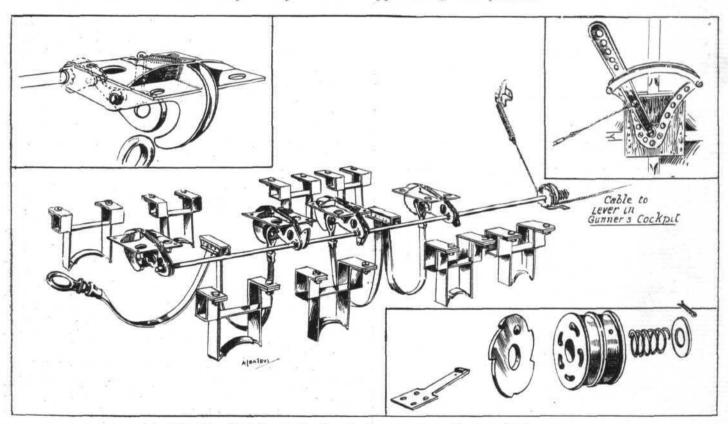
Details of the bomb gear on the Albatros biplane.
